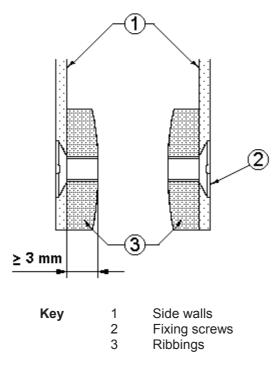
Reinforcement to underside of adjustable saw blade guard side walls
